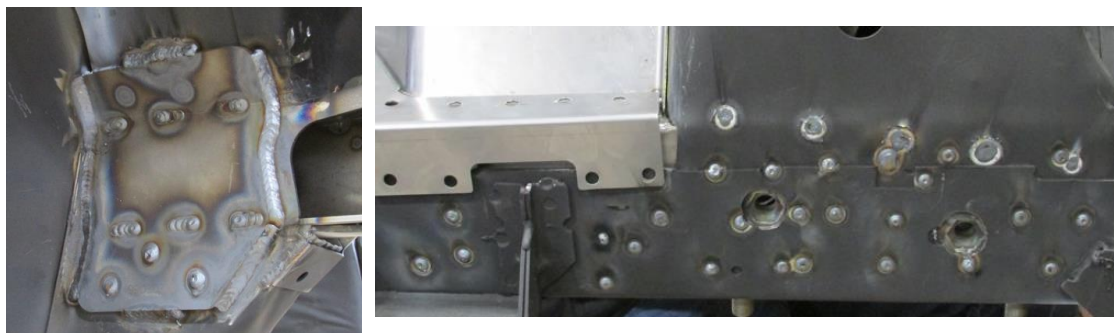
Weld Gusset Plate and Inner Rail Plug Welds
